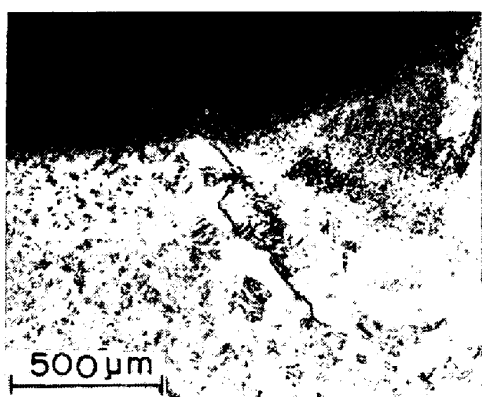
SR cracking propagated from weld toe. (Steel A1)
